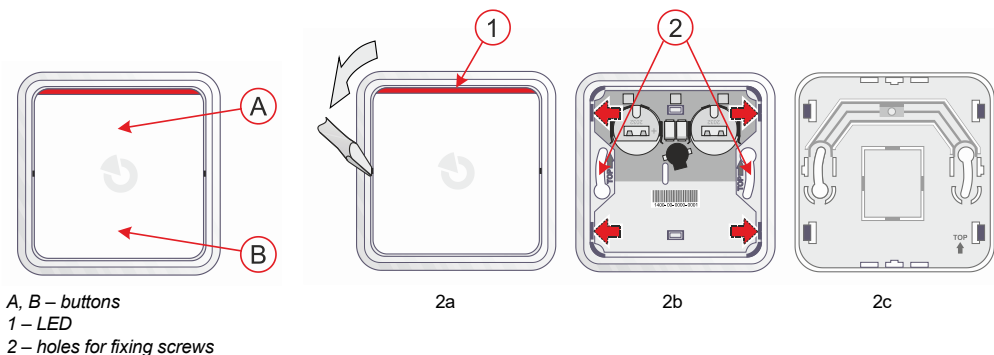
Description of external parts of the product and layout of the button into 3 parts
